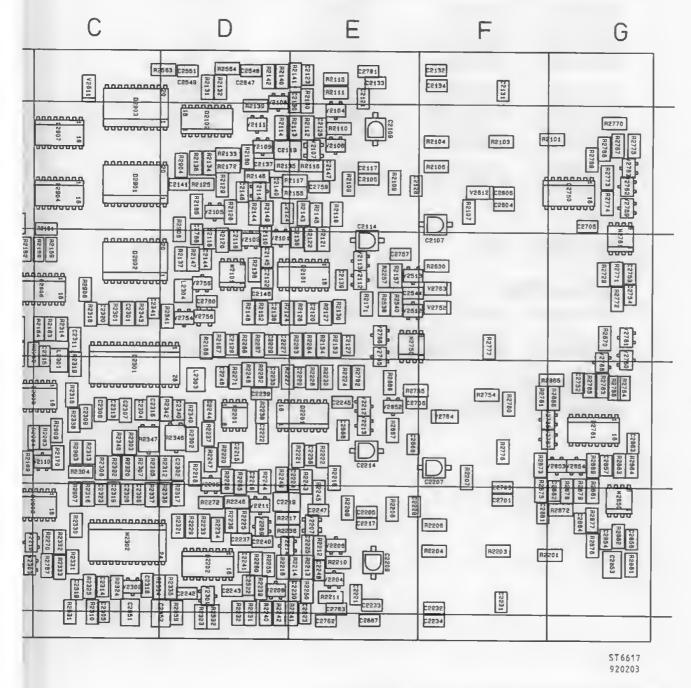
Analog A2 PCB assembly (SMD components side)
